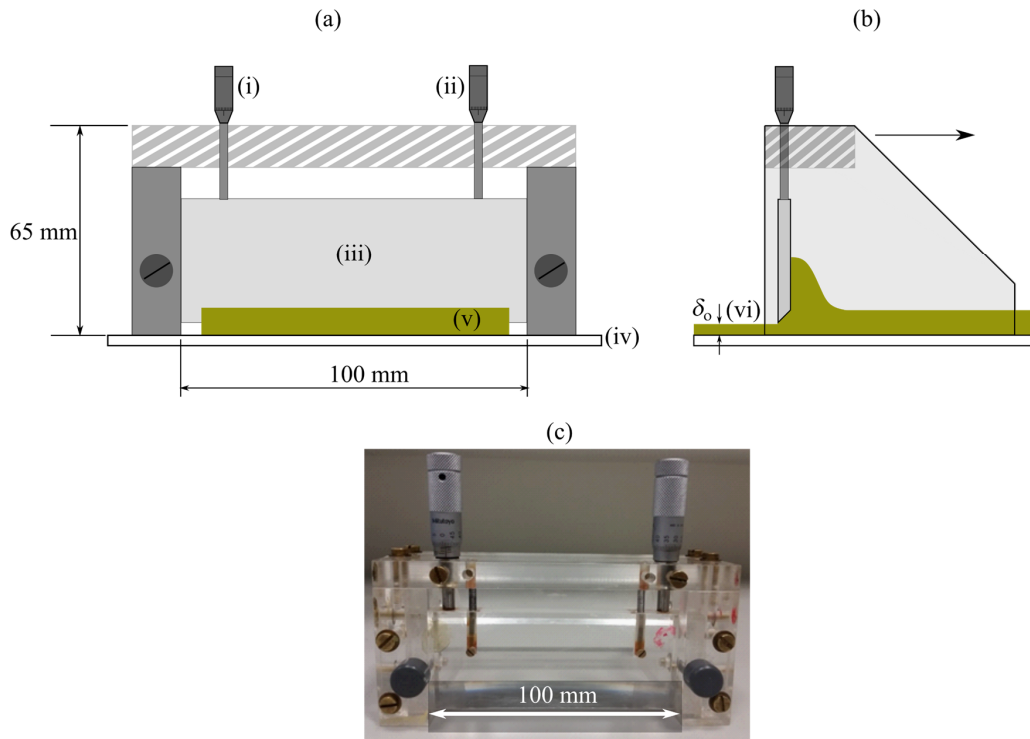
Schematic representation of (a) front and (b) side views and (c) photograph of the front view of the spreader tool. Arrow in (b) indicates the direction of movement of the tool.
